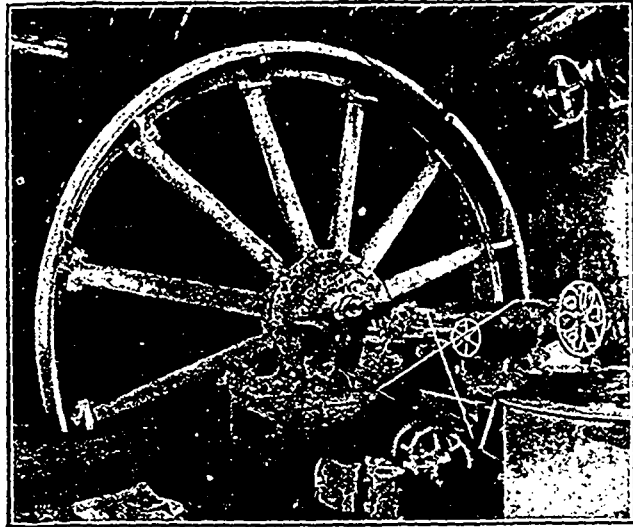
LAURIE ENGINE & MACHINE CO'S THIRTY FOOT ROPE PULLEY IN LATHE.
